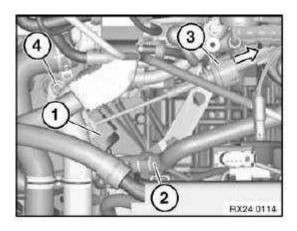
Identifying Plug, Cable Locking Sleeve And Hose Courtesy of BMW OF NORTH AMERICA, INC.
